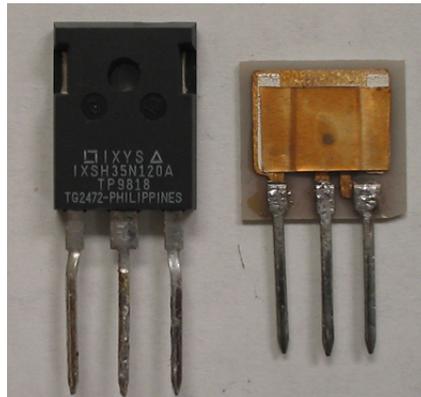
Comparison of the commercial wire-bonded single-chip power package (left, TO-247 power package) with the low-temperature sintered silver joint power package (right).
